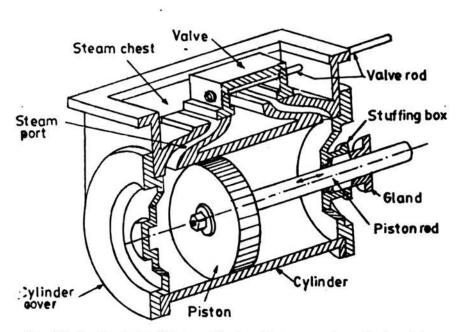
Sectional pictorial view of horizontal steam engine cylinder, piston, stuffing box and gland, steam chest and D-slide valve.
